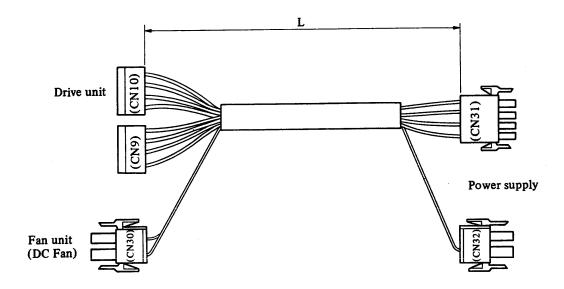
Power cable B660-1995-T041A (for drive and fan unit)
